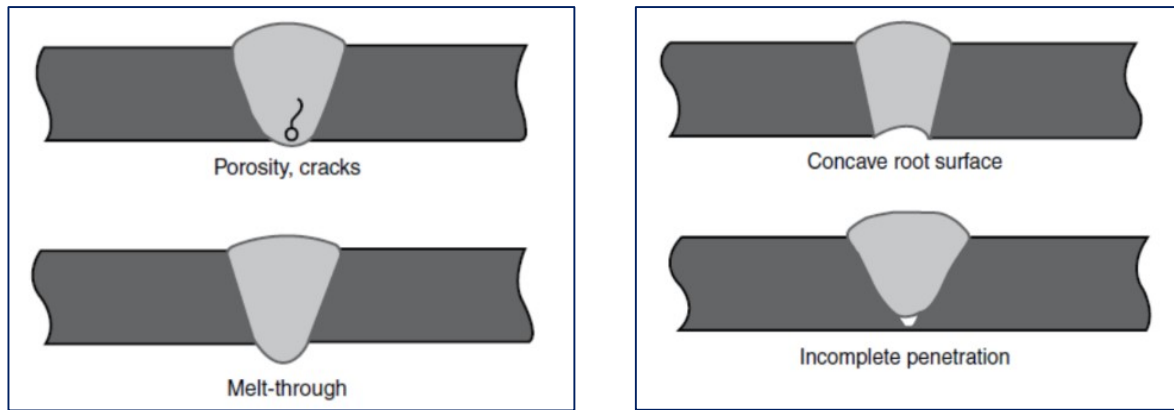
Defects in the root side of the weld [111]
